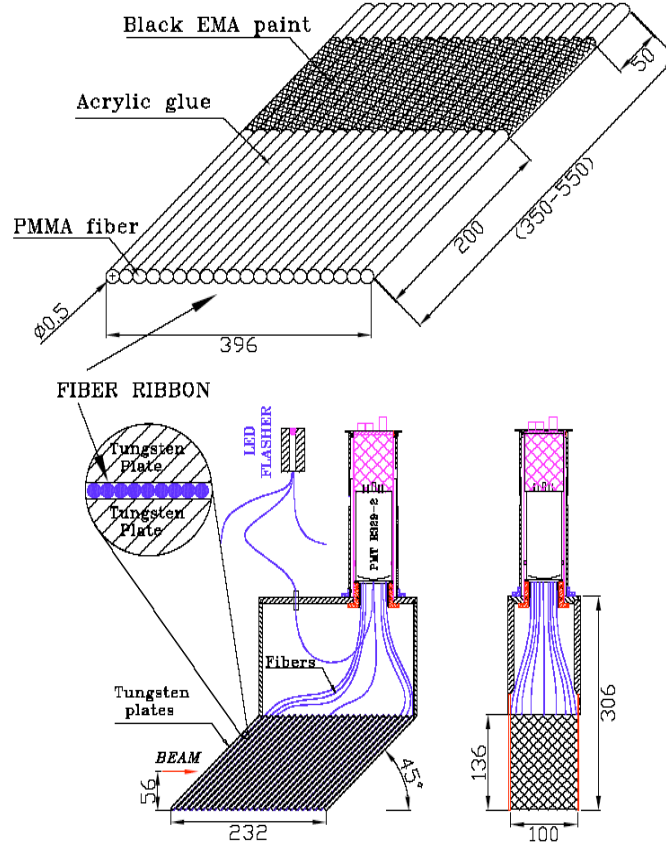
Zero Degree Calorimeter module assembly. All dimensions shown are in units of mm . [45]
